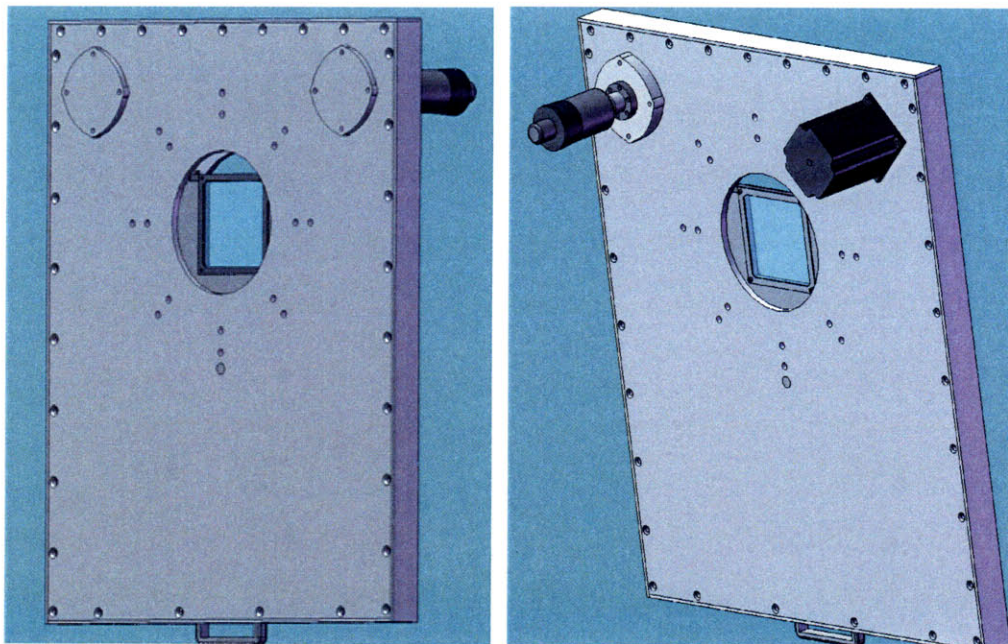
Filter Wheel Fully Assembled Front and Rear View
